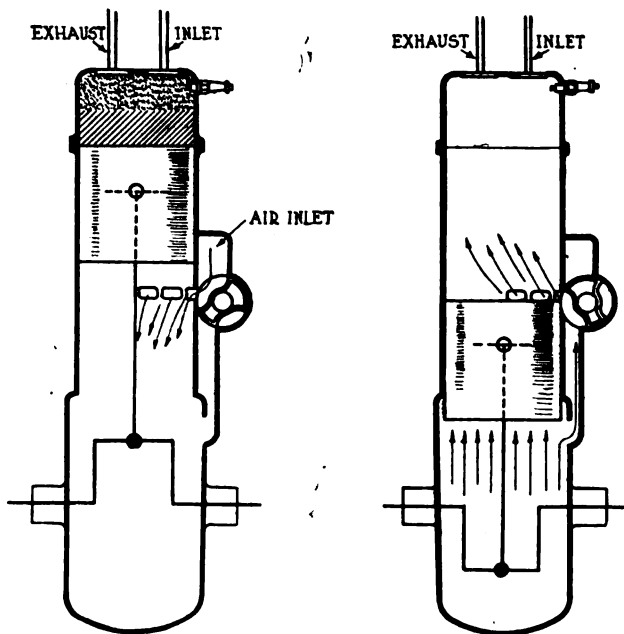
Sketch showing cycle of Kessler super-charging engine and also stratification charge and cushioning effect under piston
